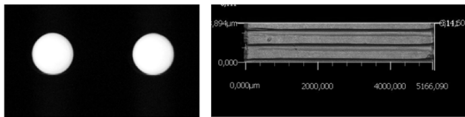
Carbide, t=5 mm; Entry diameter 146µm (left); LSM scan of cross section (right)
